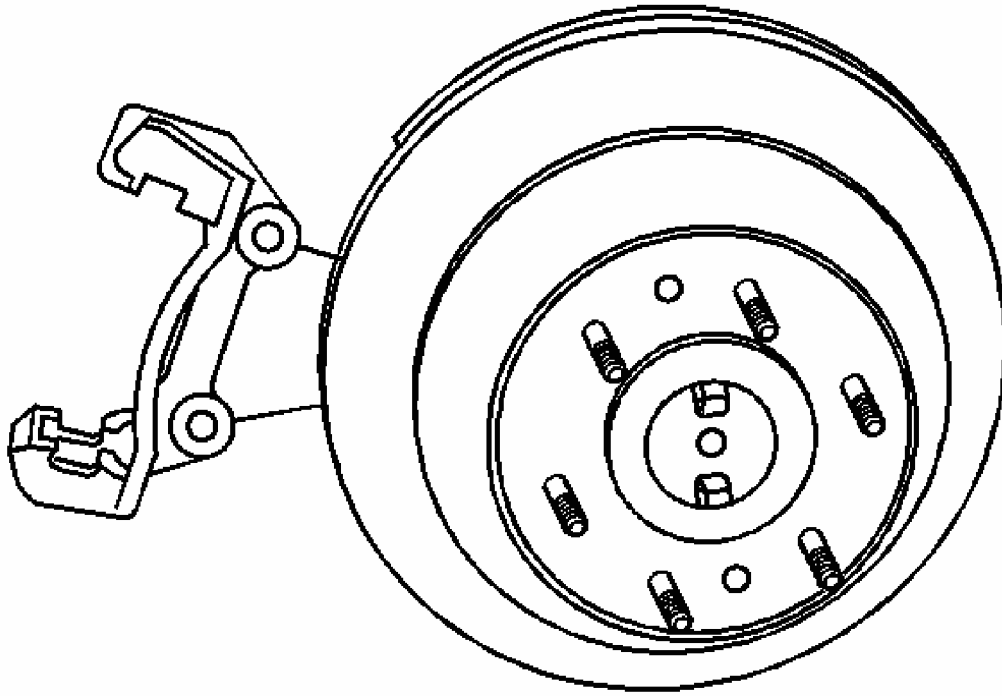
View Of Caliper Mounting Bracket & Rotor
